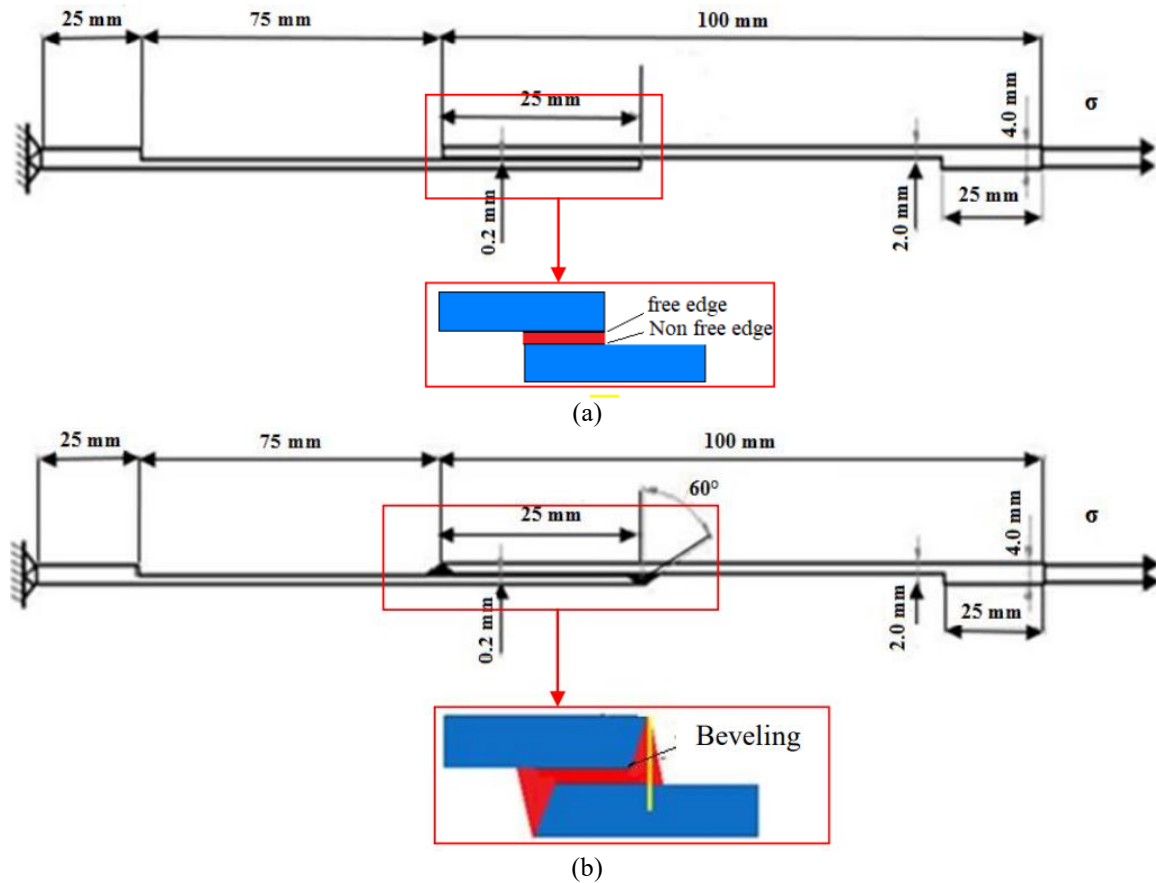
Finite element geometric model of the plate and the adhesive: a)- without beveling, b)- with beveled
